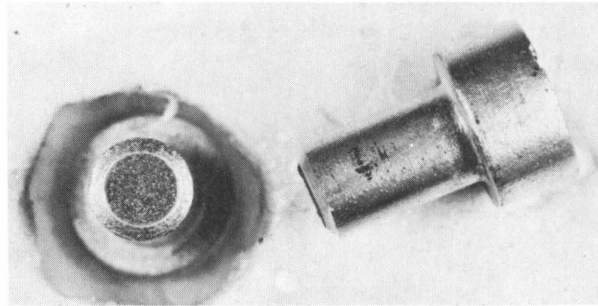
Fracture Surface from Tensile Test of Irradiated 212-B (High charge)
